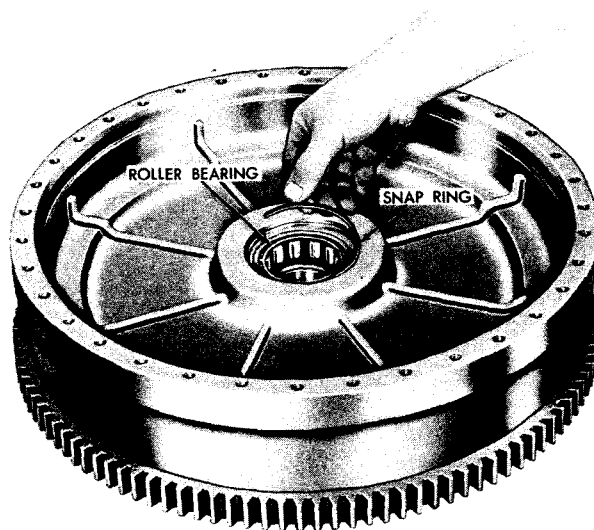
Removing (or installing) flywheel roller bearing snap ring
